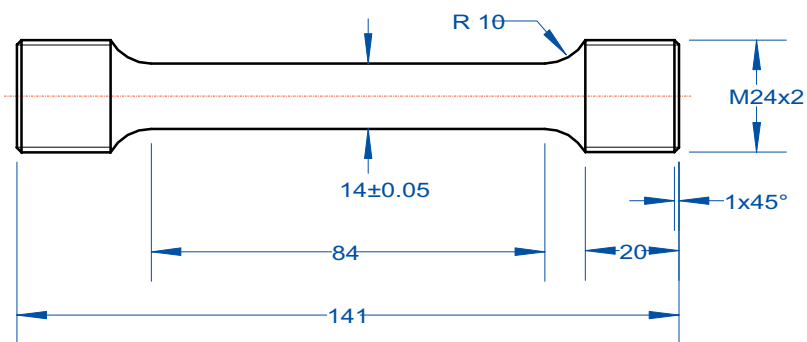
Medium sized tensile test specimen, denoted TM# or LM# in the sketches.
